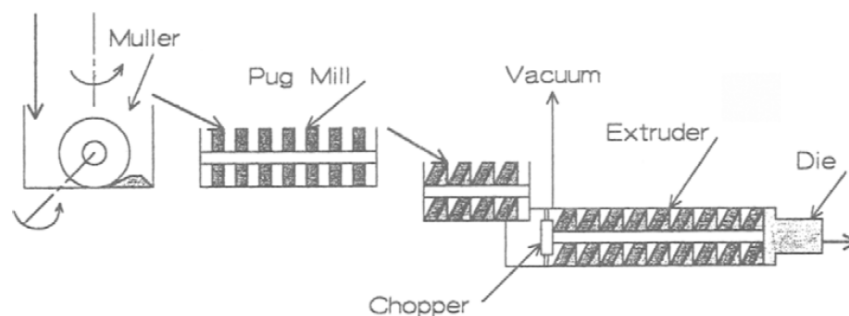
Extrusion processes, which include mulling, pug milling and a vacuum extruder (King 2002)
